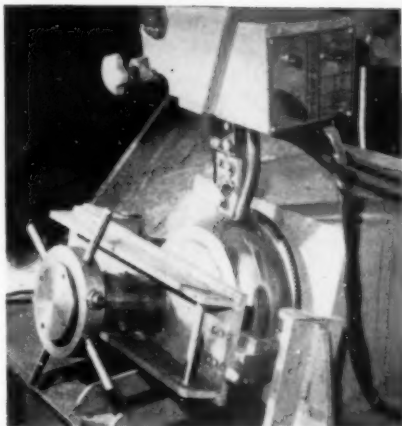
Weld-assemblies front and rear halves of outer case for new torque converter. After work is loaded and clamped with capstan screw, operator pushes button, "Automatic Lincolnweld" head lowers as work starts to rotate at preset speed. Welding is done with  $\frac{1}{8}$ " diameter electrode in blanket of Lincoln 760 Agglomerated Flux. Production is 60 welded assemblies per hour.
